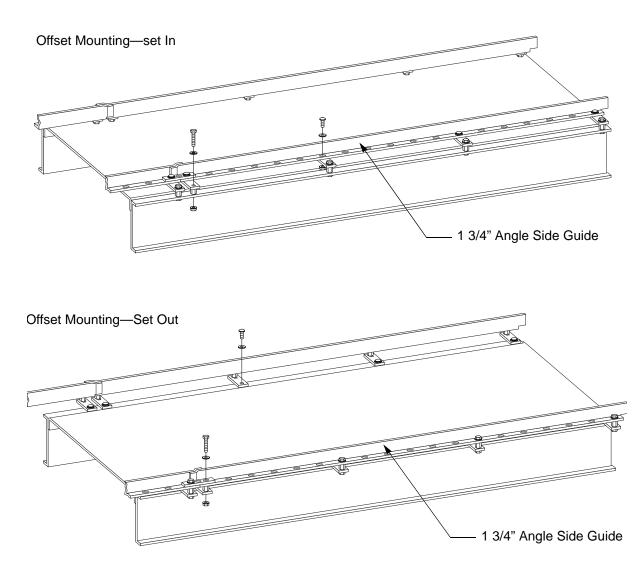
1 3/4" Angle Guide, Offset Mounting—Both Set In and Set Out Shown
